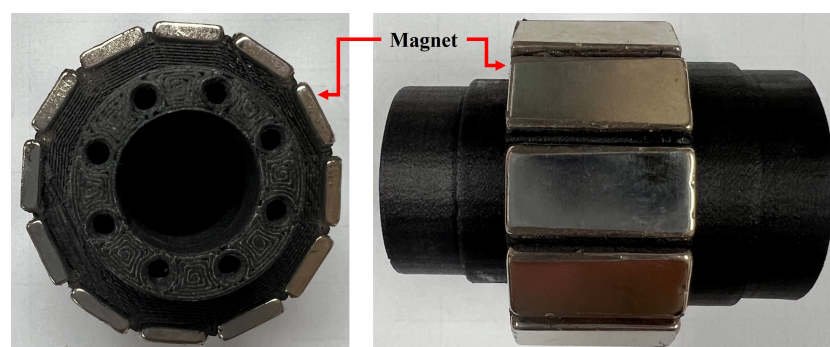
Fabricated hollow-shaft rotor produced via 3D printing and assembled with twelve neodymium permanent magnets.
